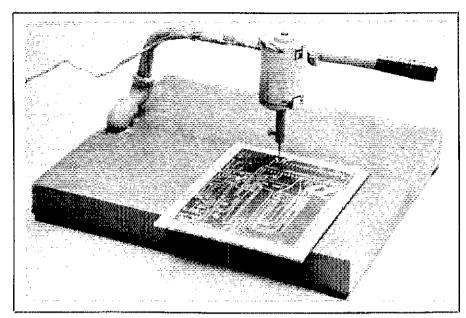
Photo of the pc-board drill press built by K4VIZ.
